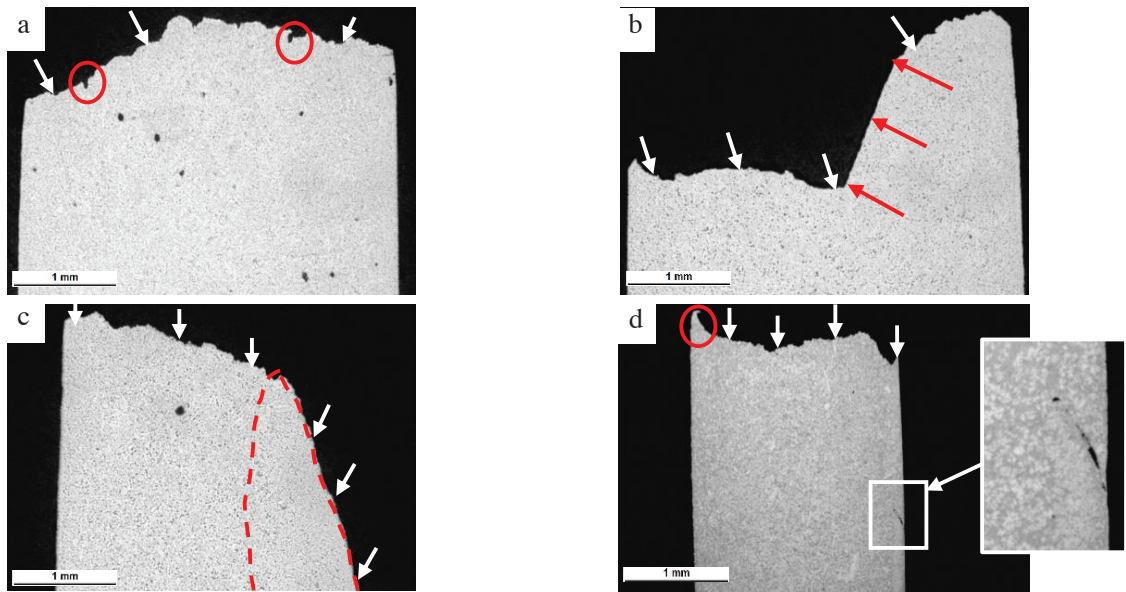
Metallographic section perpendicular to the fracture surface shown in Figure 4: a) gas porosity, b) cold flake, c) cold shut and d) lamination. Fracture surface is pointed by white arrows and defects on the fracture surface are indicated in dark colour.
